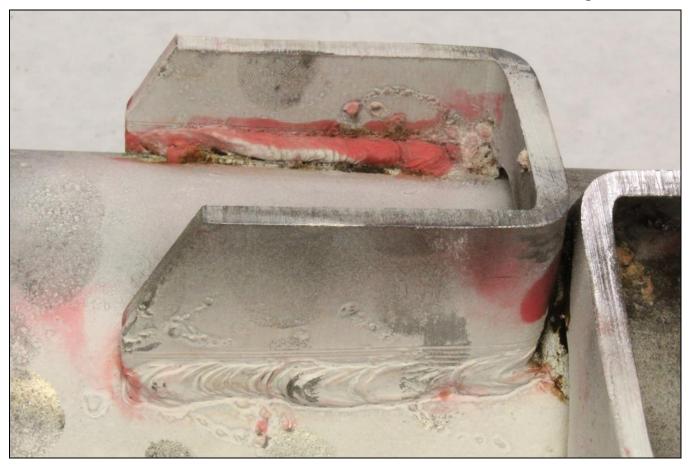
Image of the Lug B1 exterior top welds after dye penetrant media had been used during inspection.
